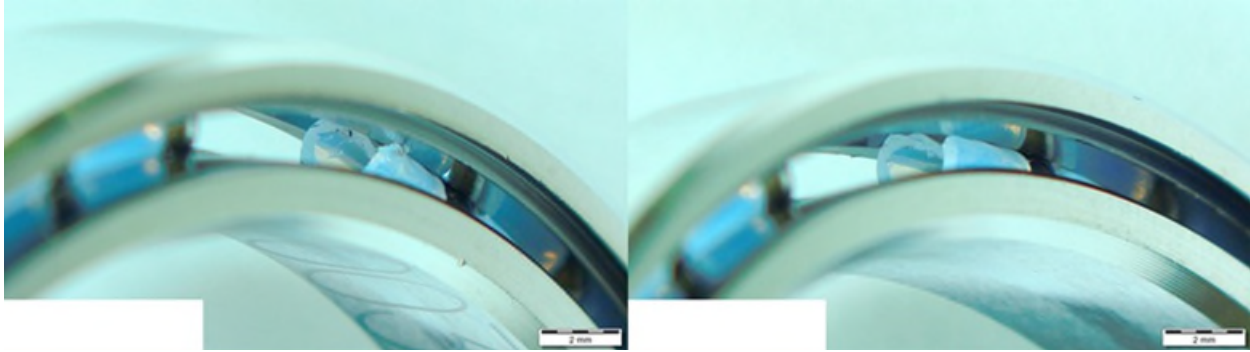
Damaged PTFE ball spacers in a rolling element bearing.
